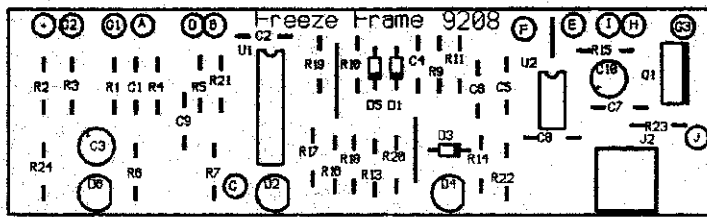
Parts placement. Components mount on the circuit board at the locations shown above.
